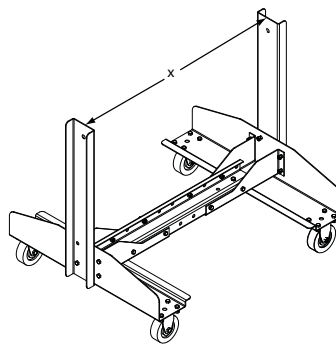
Fan Width Dimension For Roll-About Floor Stand
